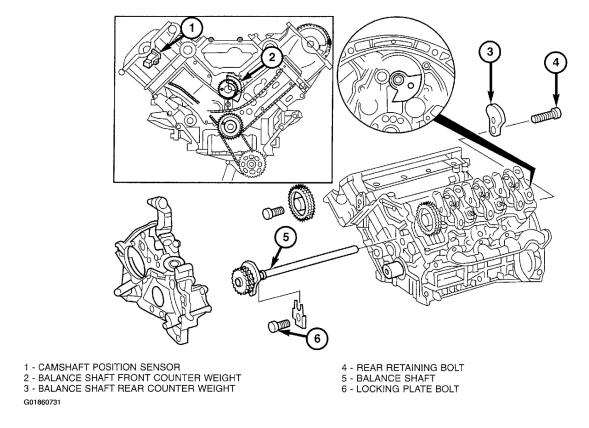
Installing Balance Shaft Courtesy of DAIMLERCHRYSLER CORP.
